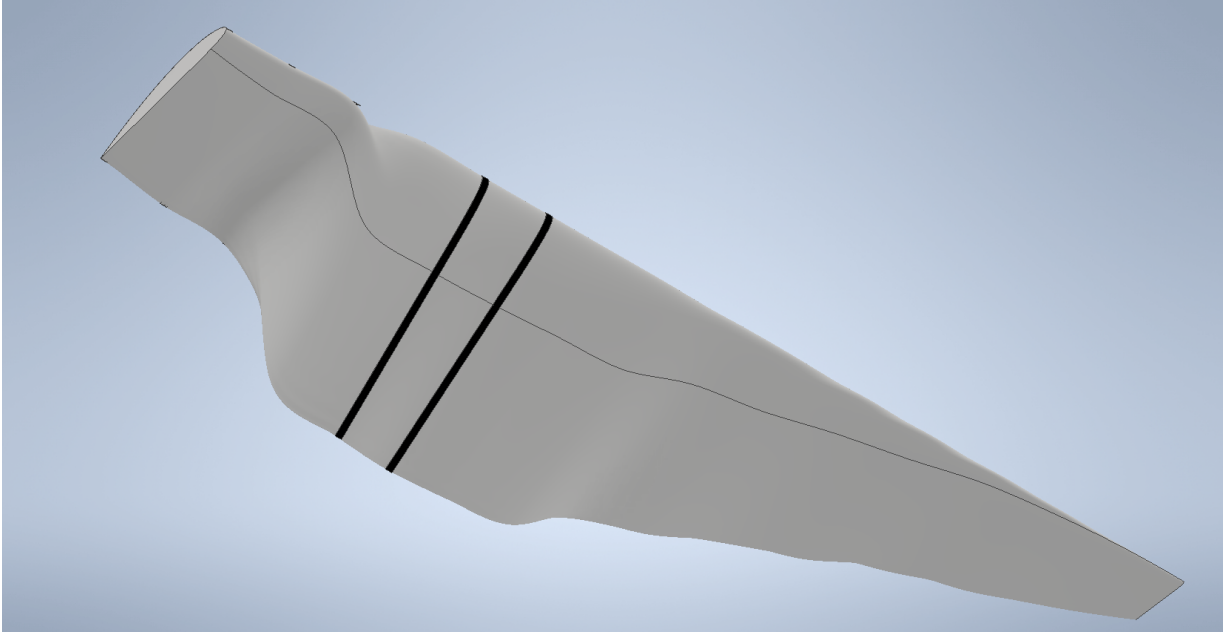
Isometric view showing bottom side of propeller blade with two actuator strips
